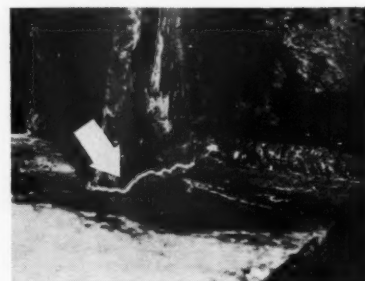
Magnetic powder pattern marks a crack in a weld
